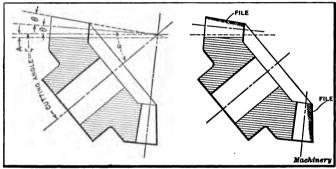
Parallel Clearance best adapted to Shaping with Formed Cutter Part Corrected by Filing
